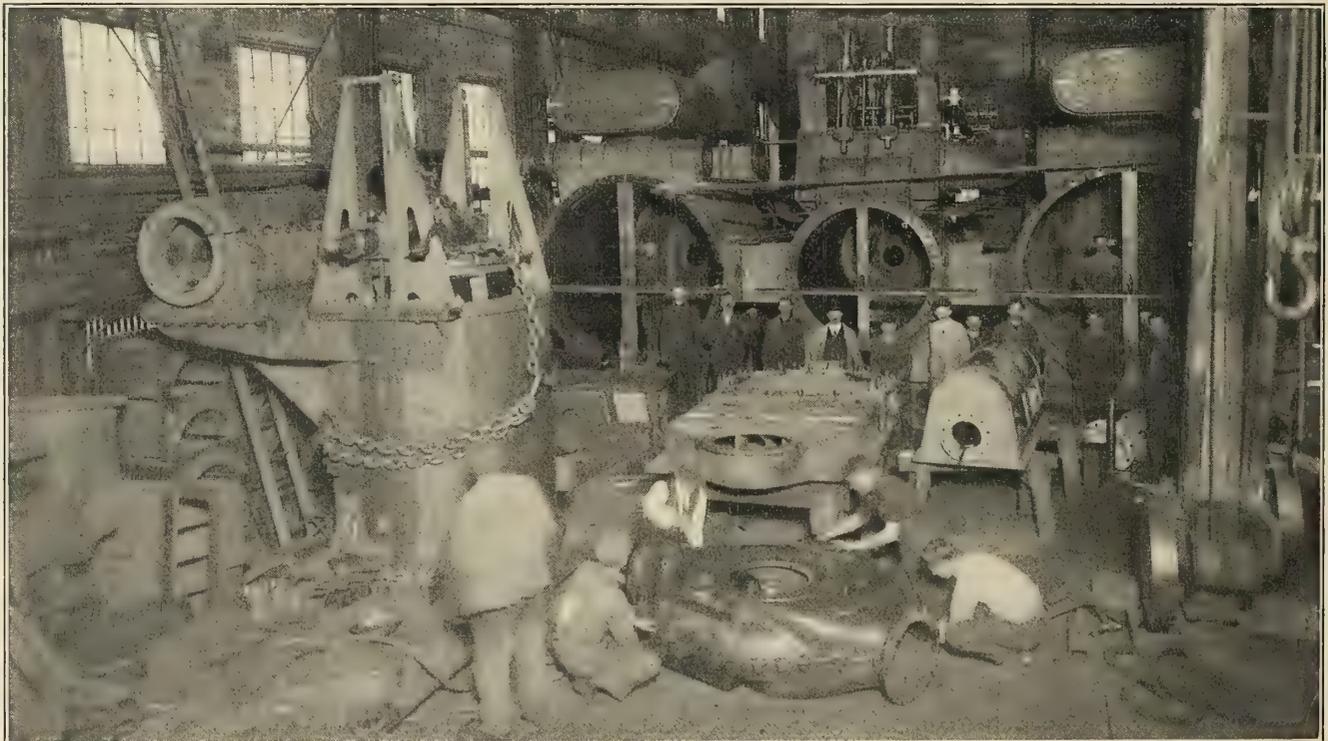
MAIN ENGINE ON ERECTING FLOOR OF BUILDER'S SHOP
